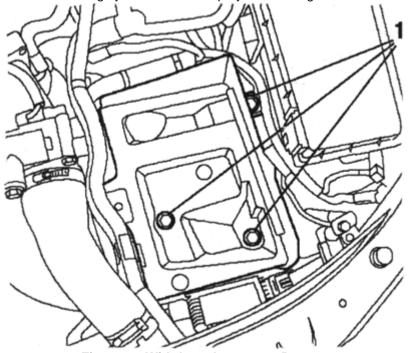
Withdrawal support Battery: 1 - mounting screws
